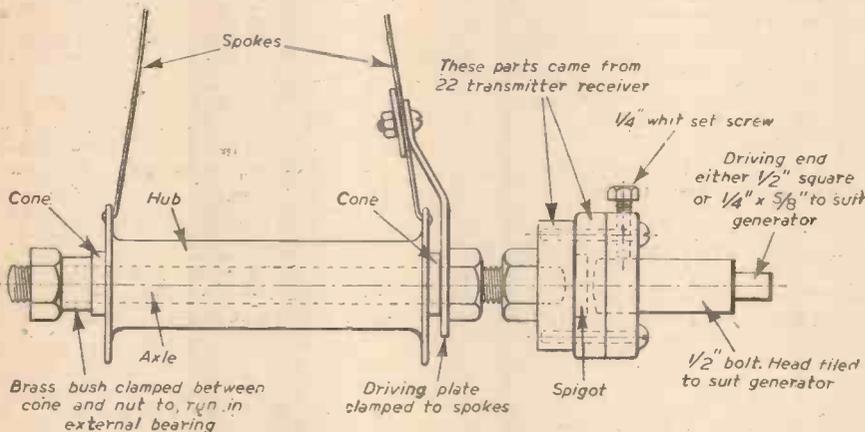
Details of the coupling between the wheel hub and the generator shaft.
